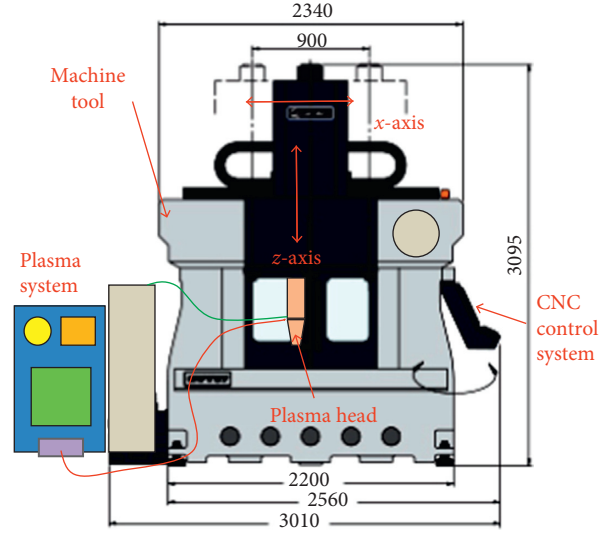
Integration of the CNC machine tool and the plasma device.
